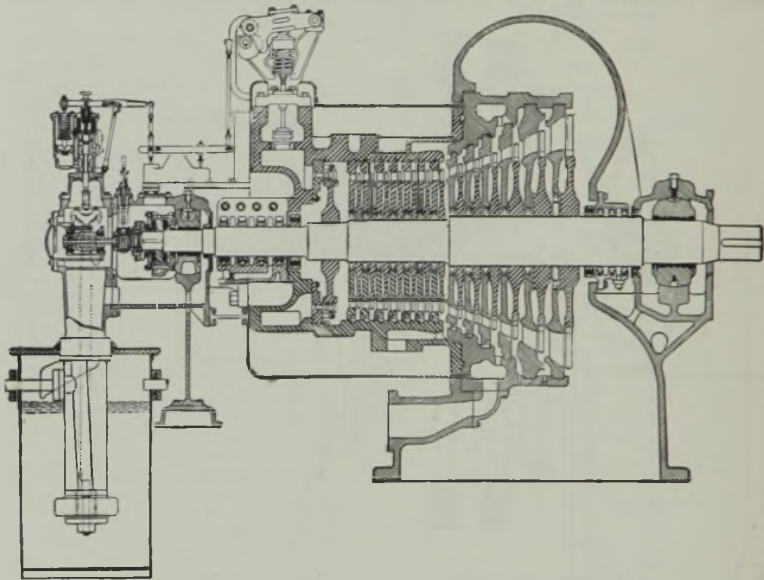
Sectional view of a Curtis-Rateau turbine of 3,000-hp rating, showing the arrangement of wheels, diaphragms, bearings, packing, and other features.
